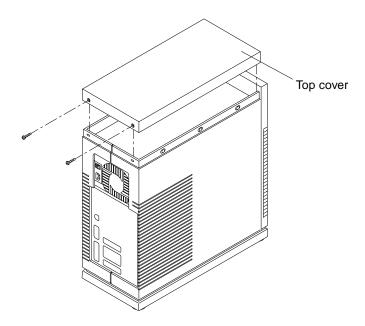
Removing and Replacing the Top Cover to the Tower Unit
